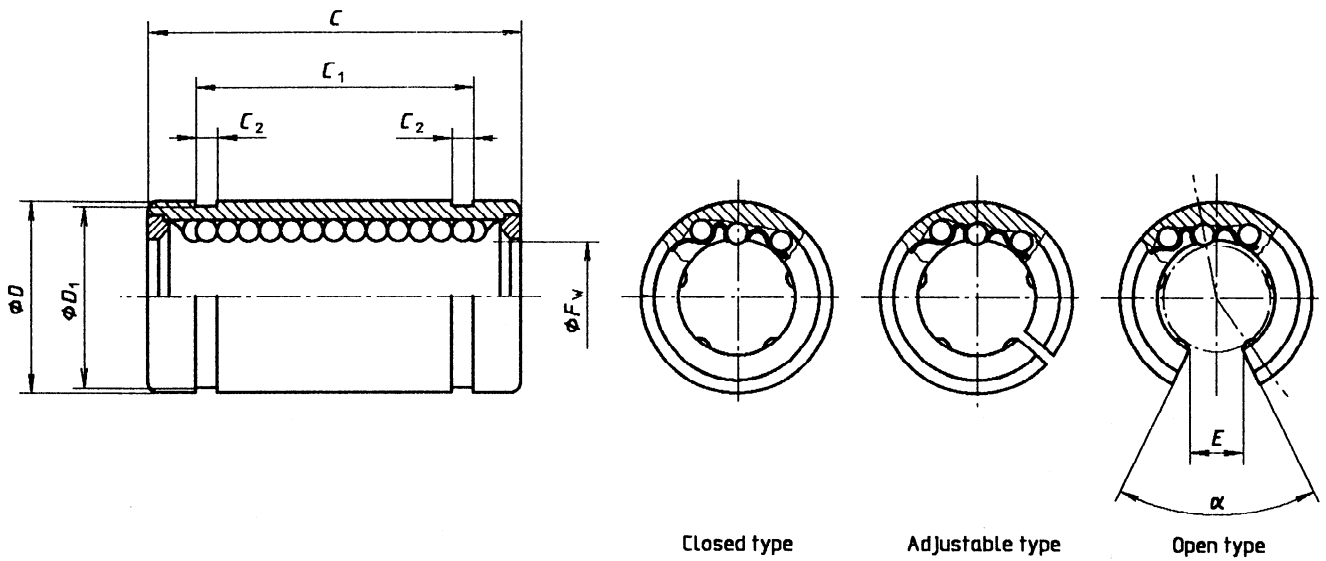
Symbols for boundary dimensions — Bearings with snap ring grooves (mainly series 3)
